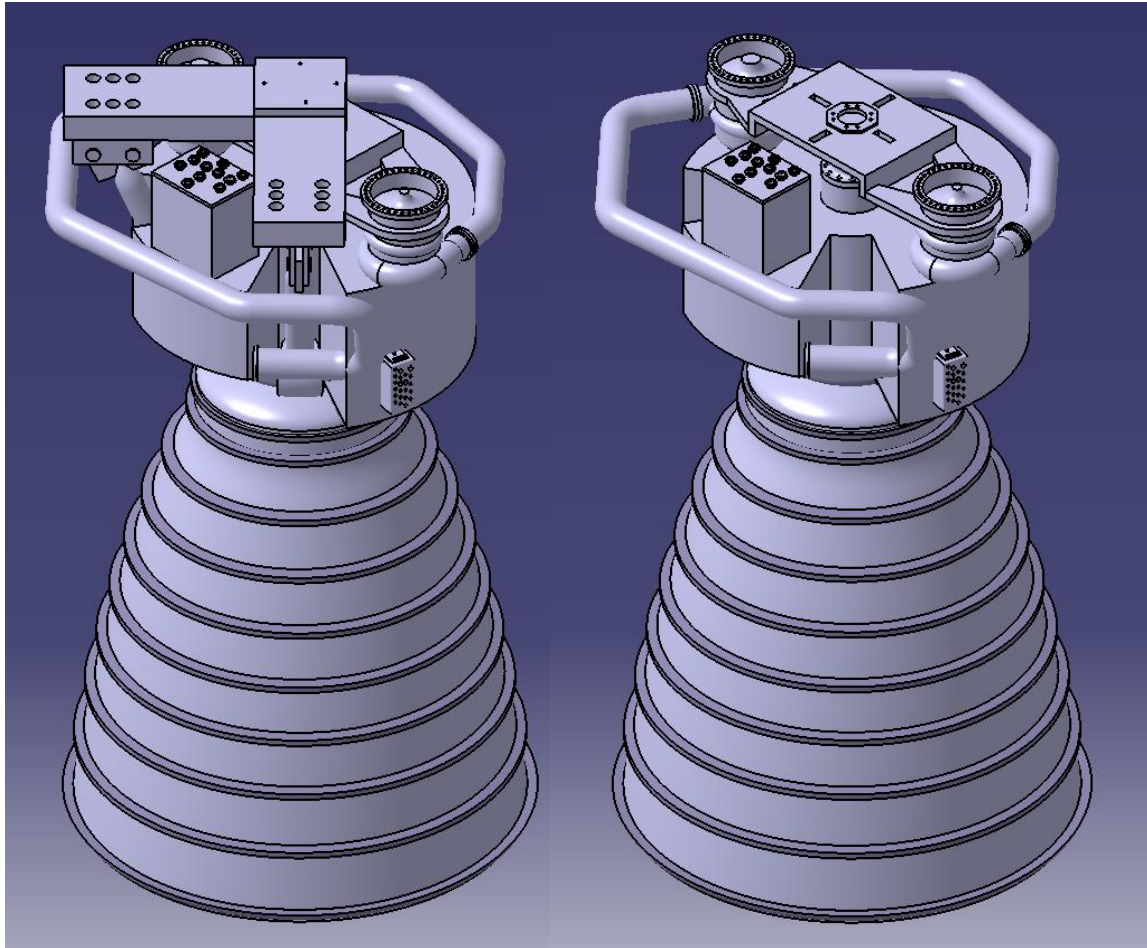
RS-25 Simplified Geometry CAD Assembly with and without Engine Mount and Thrust Adapter
